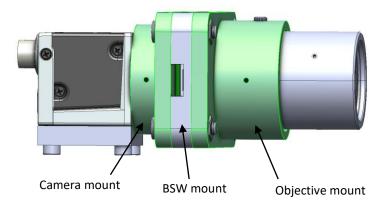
CAD model of the assembly with the camera, BSW-20 and objective.
